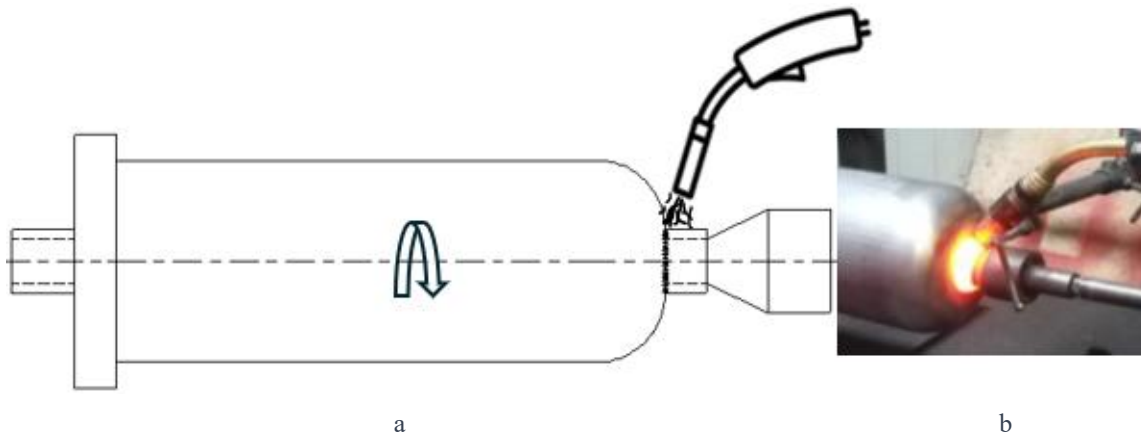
MAG welding operations setup graphic applied to deep-drawn fire extinguisher (a) and view of MAG welding operation (b)
